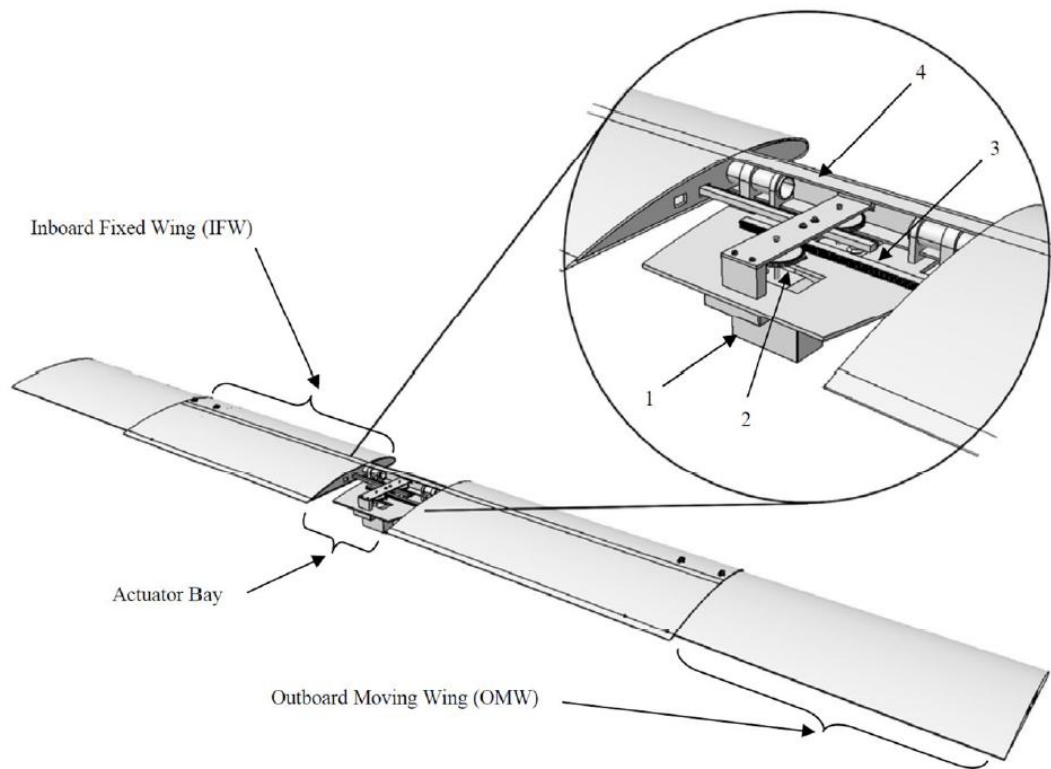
VSMW mechanical system (1- servo-motor; 2- transmission pinion; 3- transmission rack; 4- carbon spar) [3][48].
